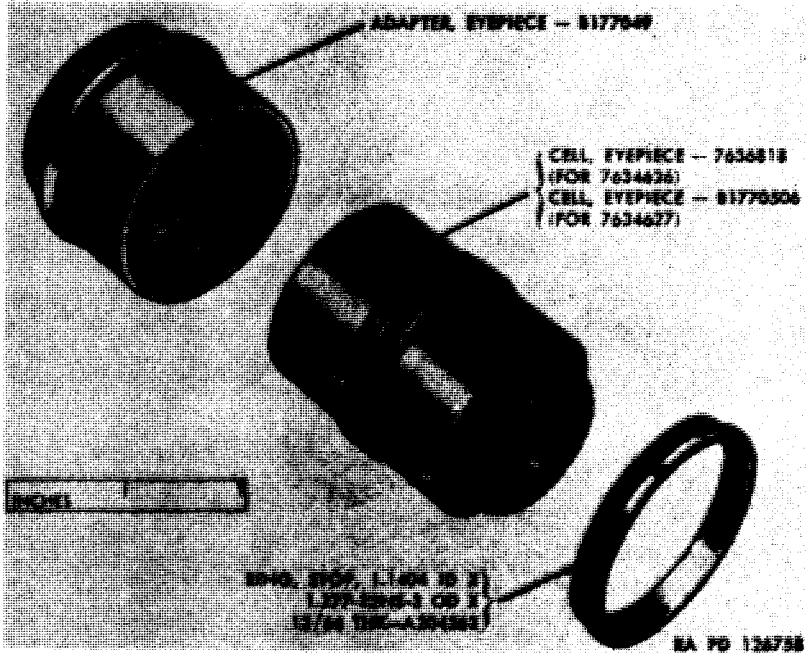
Eyepiece adapter assemblies 7634626 and 7634627 - exploded view.
